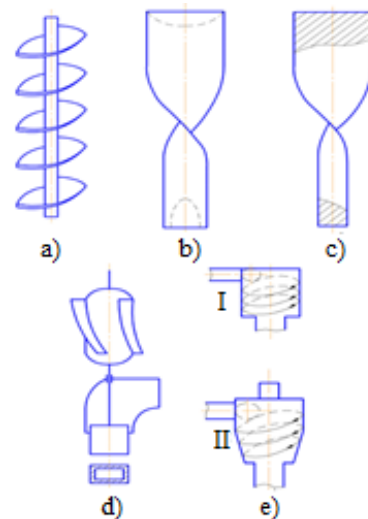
Design of elements for swirling the flow: a) screw element; b) nozzles with mutually perpendicular cross sections; c) a twisted plate; d) hydraulic turbine; e) tangential feed with cylindrical (I) and conical (II) chambers
